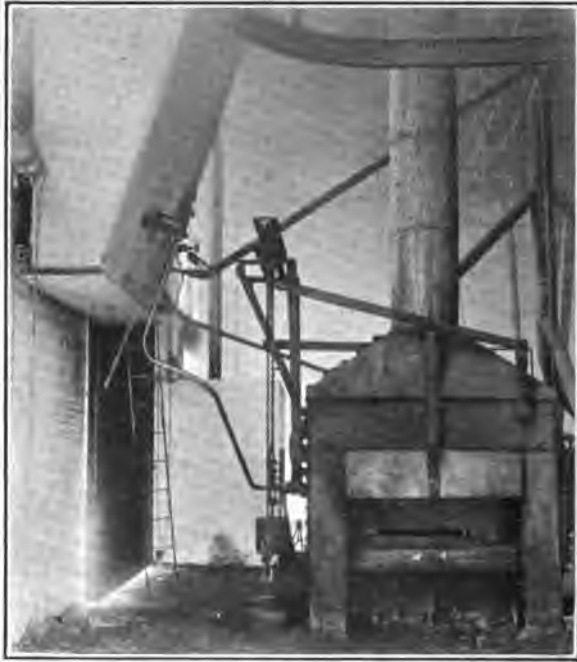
Small forging furnace with pneumatic siphon coal feeder, American Locomotive Company.
